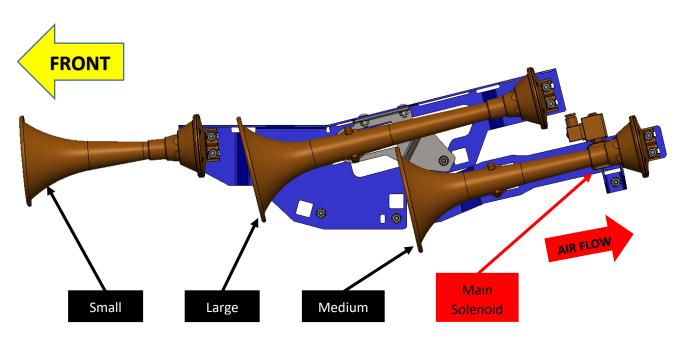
Air Horn Layout (730 Horns shown with Trumpets attached); same for 734/230 Kits
